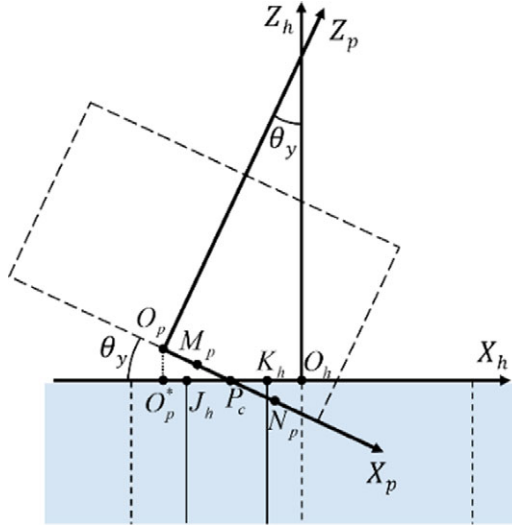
The side view of two-point contact state in the axisymmetric parts assembly.
